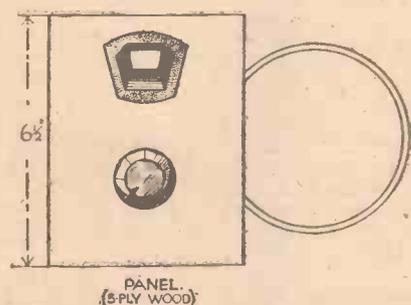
Details of coil construction. A single turn of No. 14 S.W.G. wire is used, 17 1/2 in. long.
